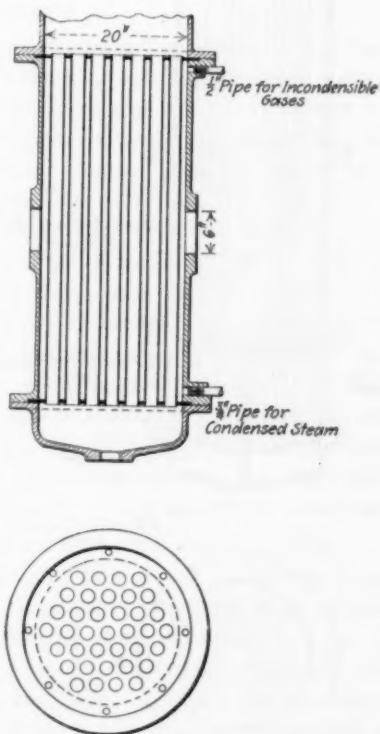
37 COPPER TUBES 2 IN. BY 48 IN. BY 18 BIRMINGHAM WIRE GAGE.
